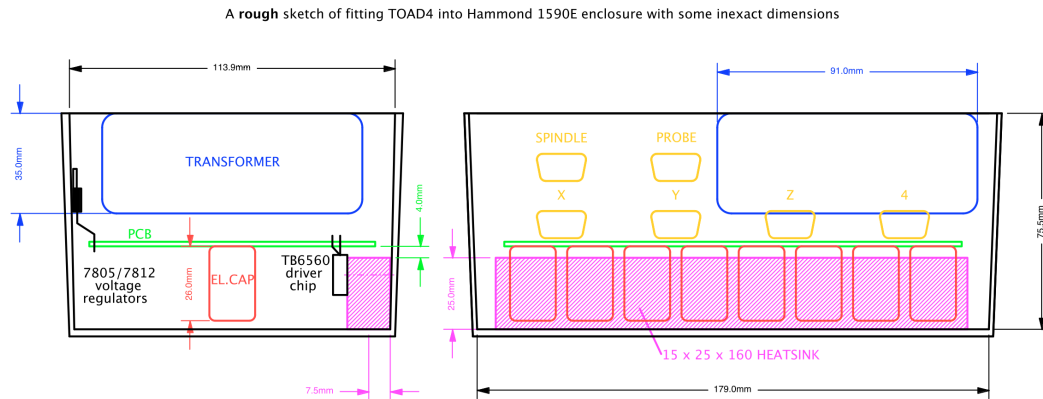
Sketch of critical parts placement in a Hammond 1590E enclosure
